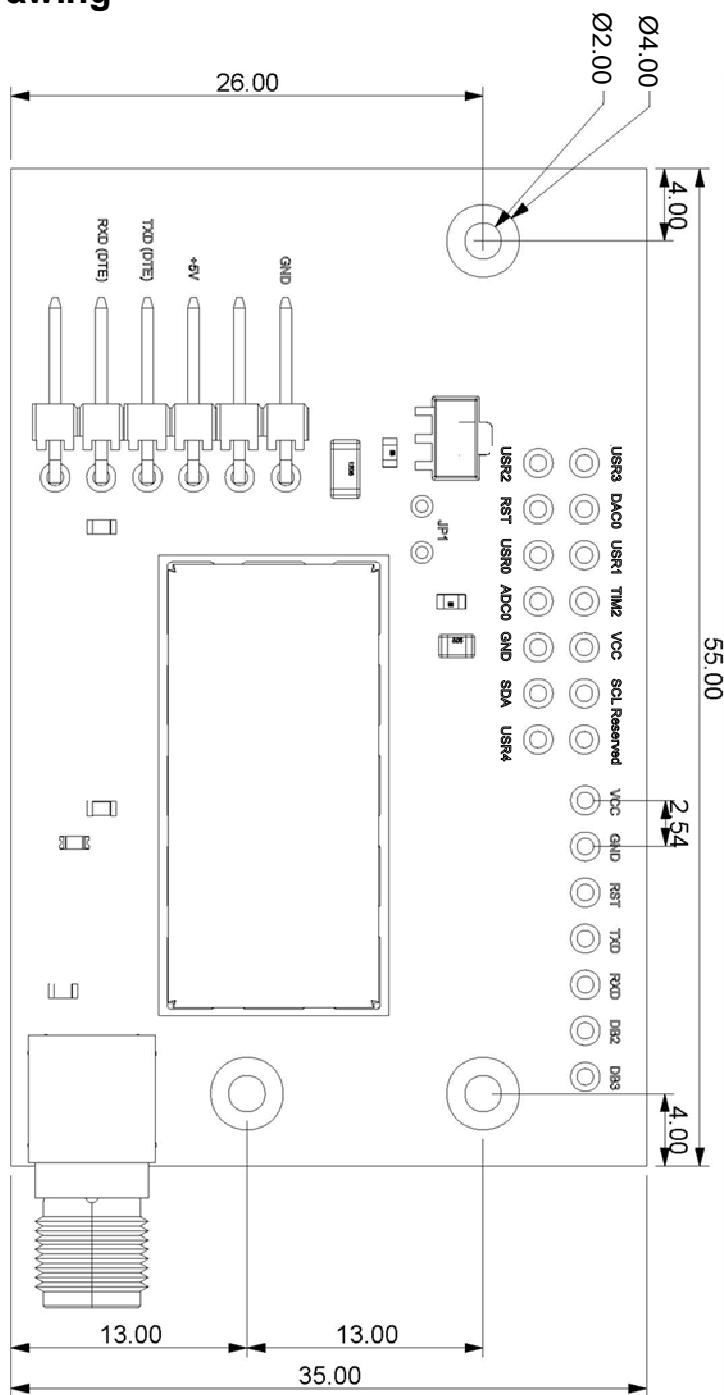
Cloud-On-Chip EVB Mechanical Drawing
